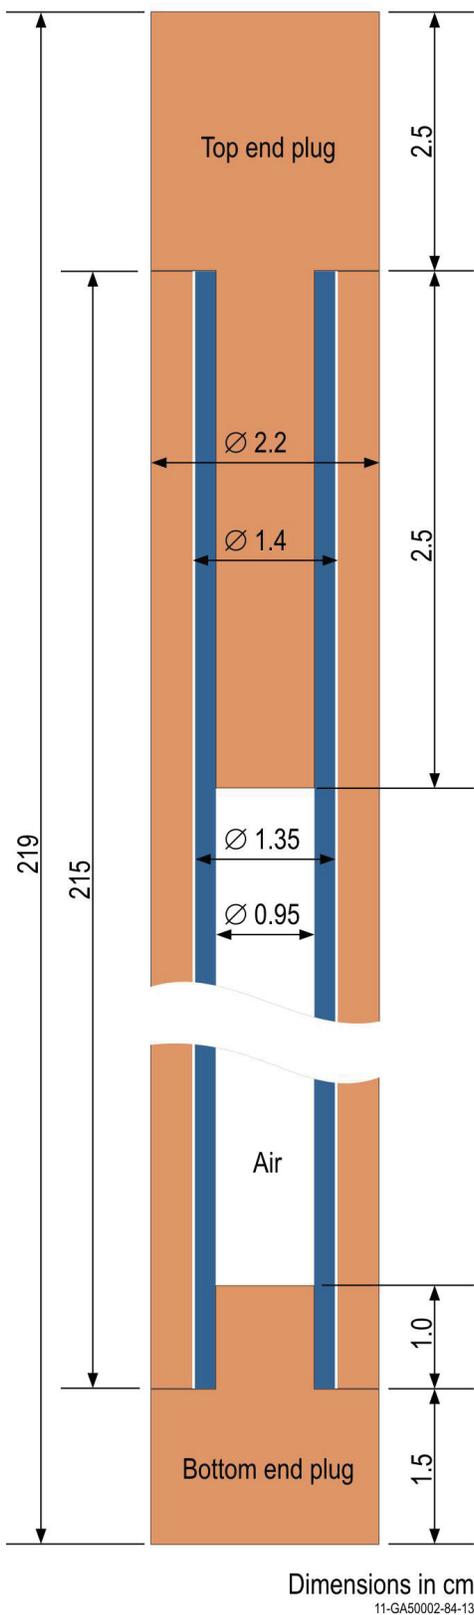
Axial View of Withdrawable Control Rod.
